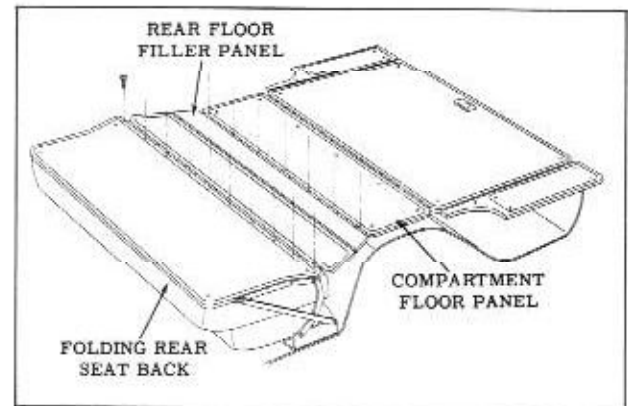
Folding Rear Floor Filler Panel Assembly
